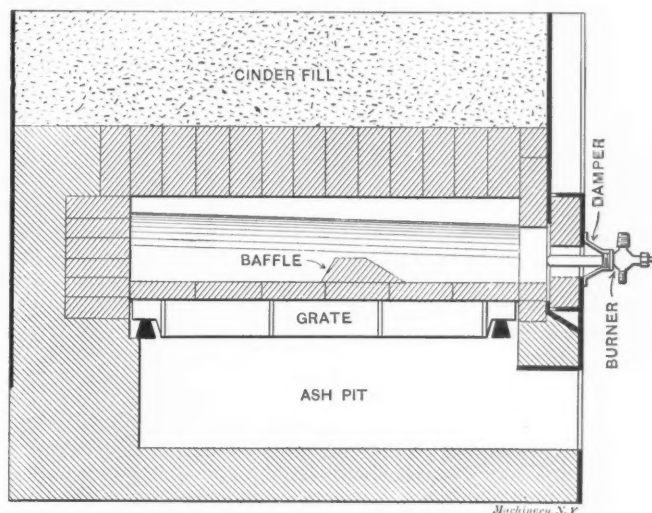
Cross-section, Refitted Casehardening Furnace.
